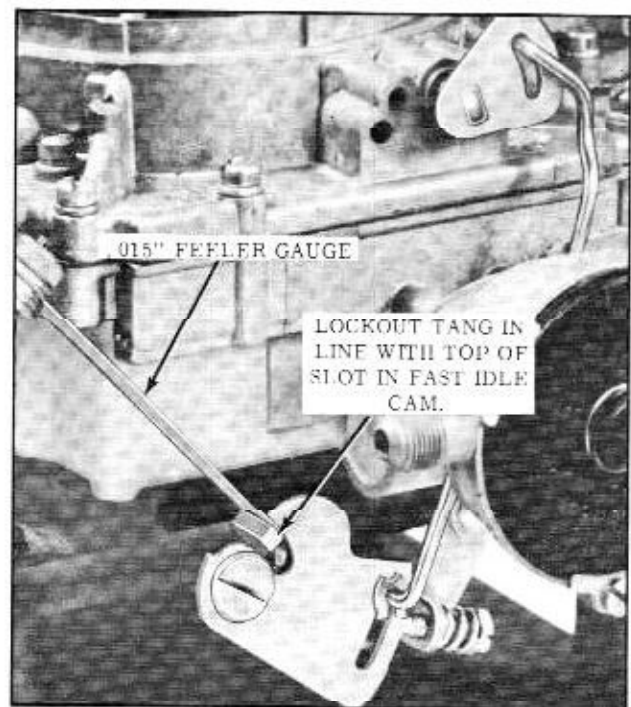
Secondary Throttle Lock-Out Adjustment
